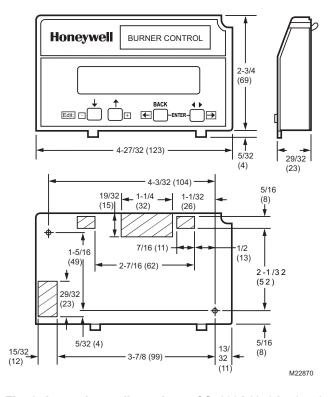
Approximate dimensions of S7800A1142 in. (mm).
